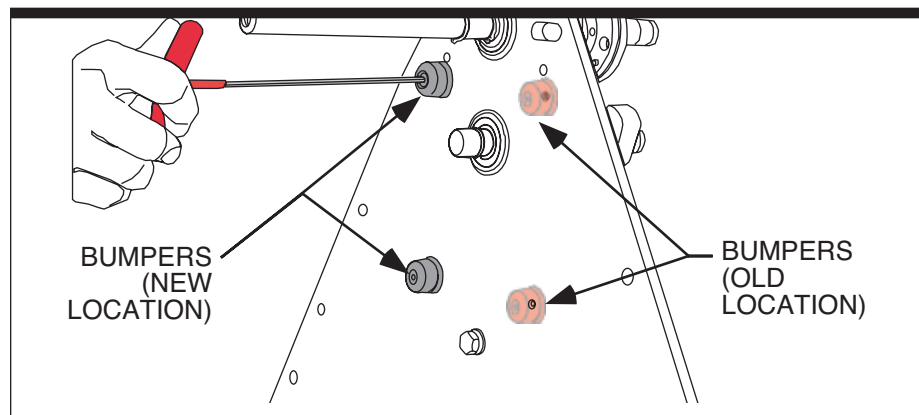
Dancer Arm Bumpers on Front of Labeler
